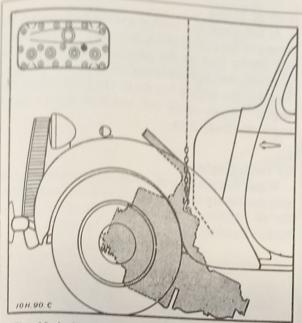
deals with the first stage of engine removal. First take the weight of the engine, using a clip under the cylinder head nut (indicated solid in the diagram) while the front and rear mountings are disconnected. The unit can then be lowered to the ground behind the front axle. Soft packing should be used for the gearbox to rest upon.
